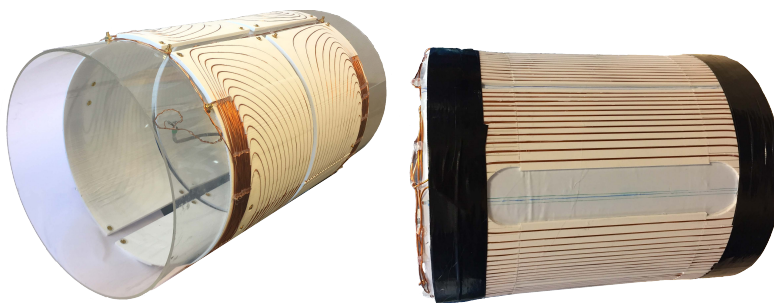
A prototype z -gradient coil (left), where the 3D printed mould is clearly visible, and the gradient coil assembly after attaching the y -gradient (right).
